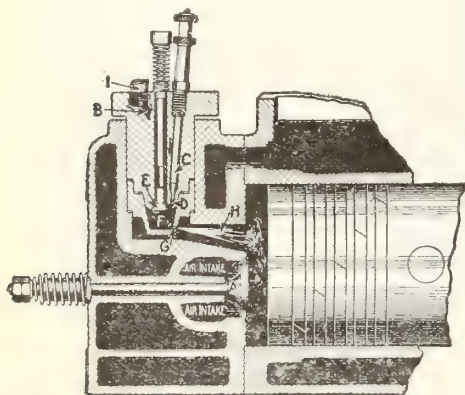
SECTION OF CYLINDER HEAD SHOWING IGNITION CUP WHICH AUTOMATICALLY FEEDS FUEL TO COMBUSTION CHAMBER.
